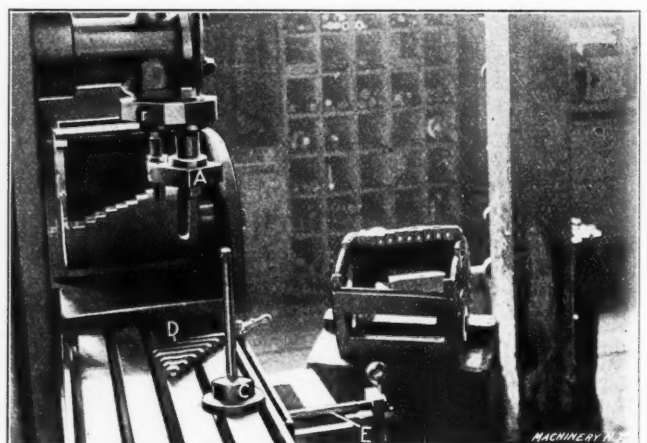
Fixture, Extension Mill and Plugs used in Machining the Lever Steps of Change-gear Box
